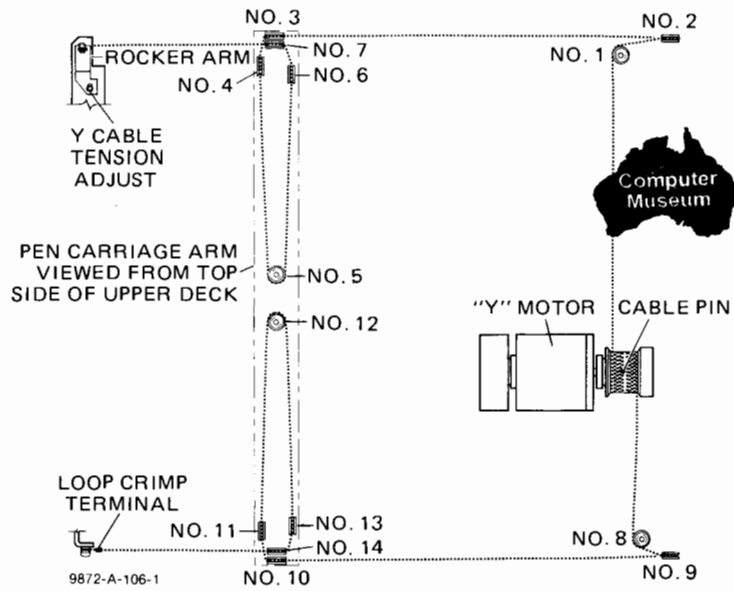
A. Y-Axis Drive Cable Stringing Diagram
